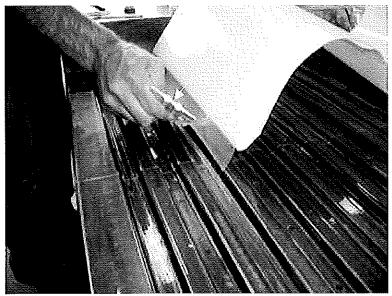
Film Application: use small hard plastic squeegee in tight corners and pressing out wrinkles
